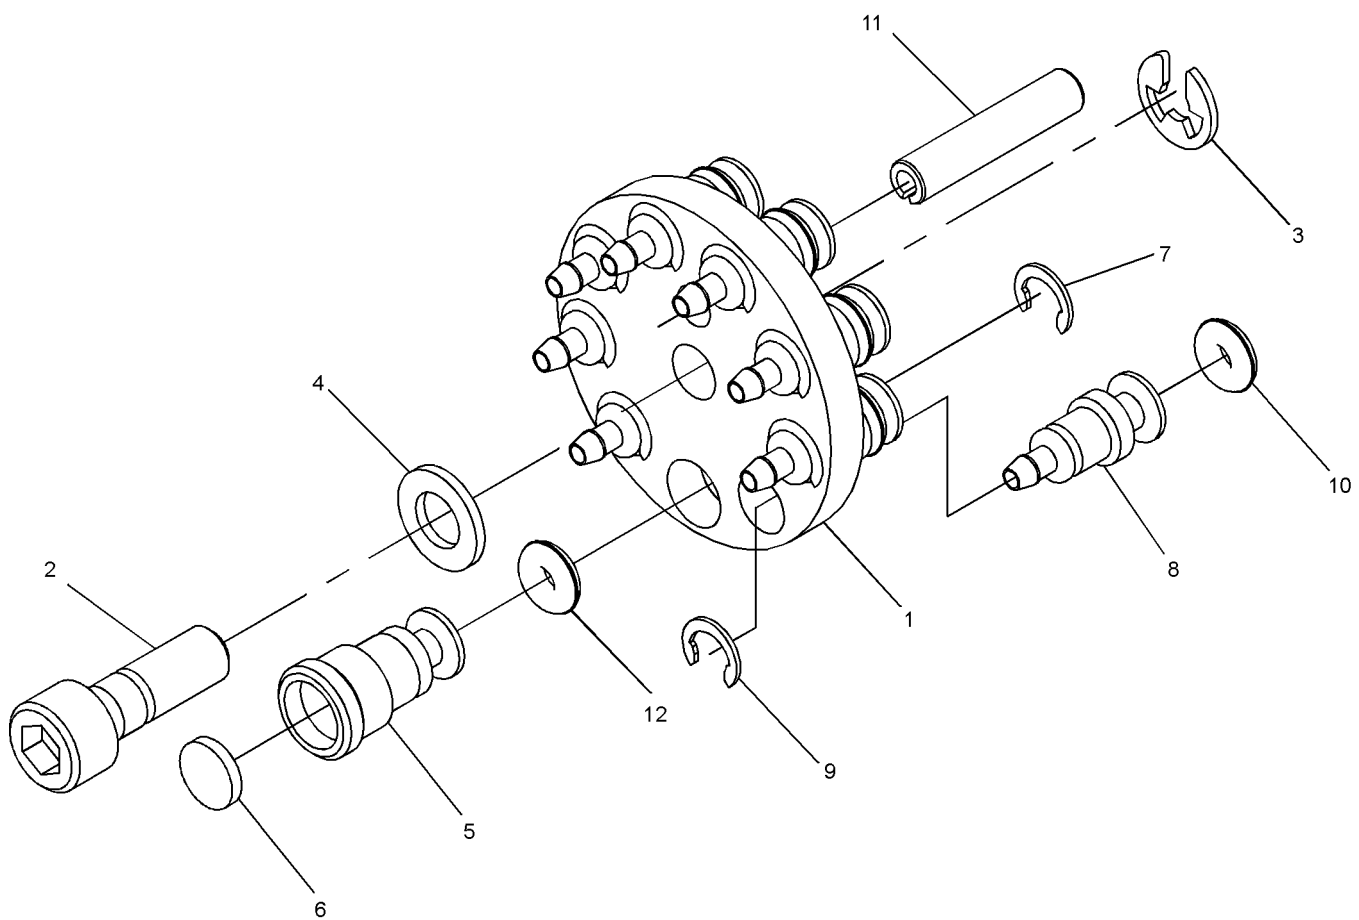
Tube Fittings Disc Assembly, P/N 1653870-1
